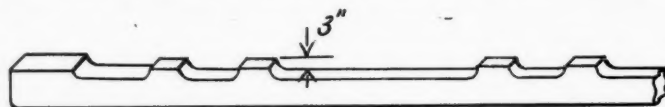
Frame Back Blocked Out Ready for Limbs and Braces.
